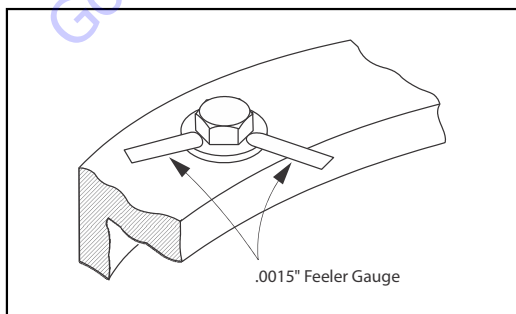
Swing Bearing Bolt Feeler Gauge Check
